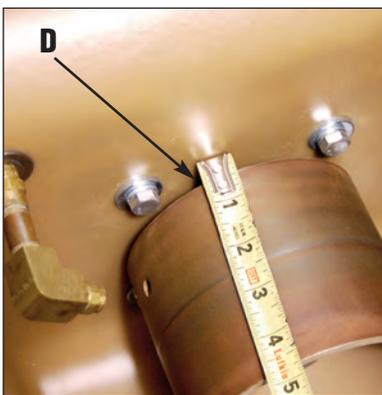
Measure Pulley to tank distance "D" before removing Lower Pulley.
